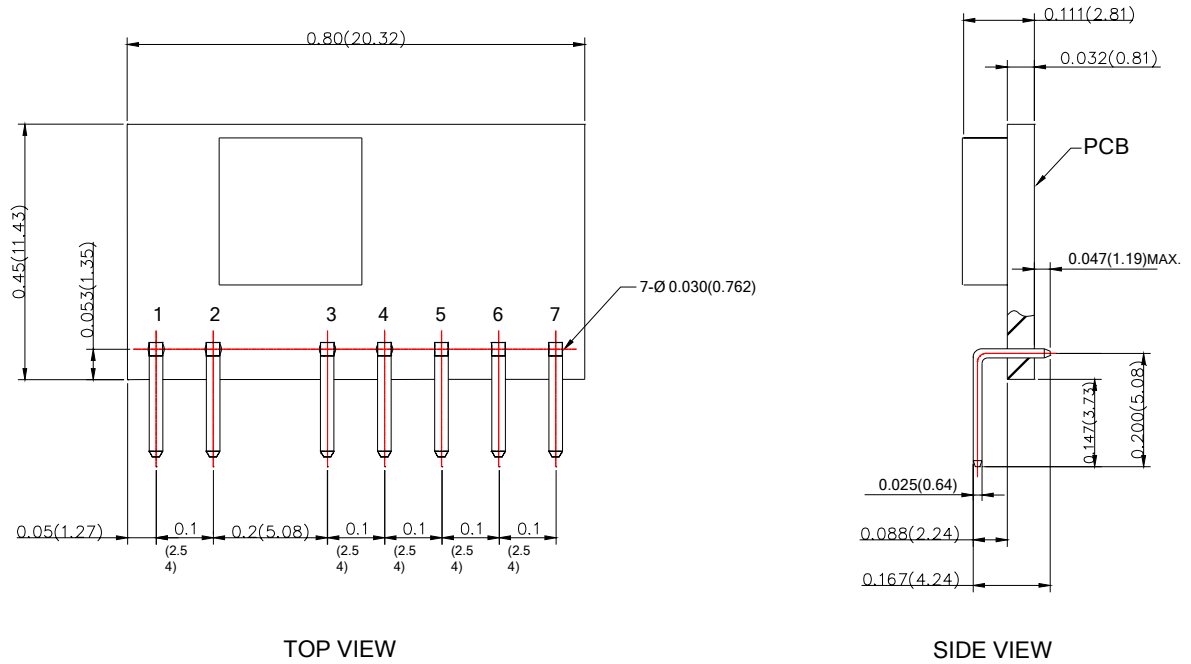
88MG816 & 88MG831 DIP Series Mechanical Dimensions
